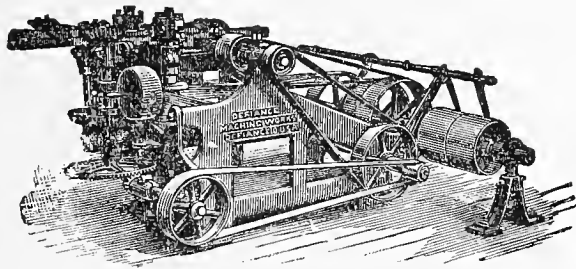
THE "KETTENRING" SAWN-HOOP MACHINE.
